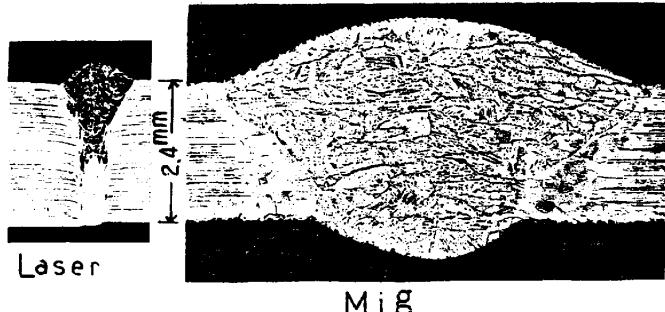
Cross section of high silicon steel joint Laser and Mig welded
